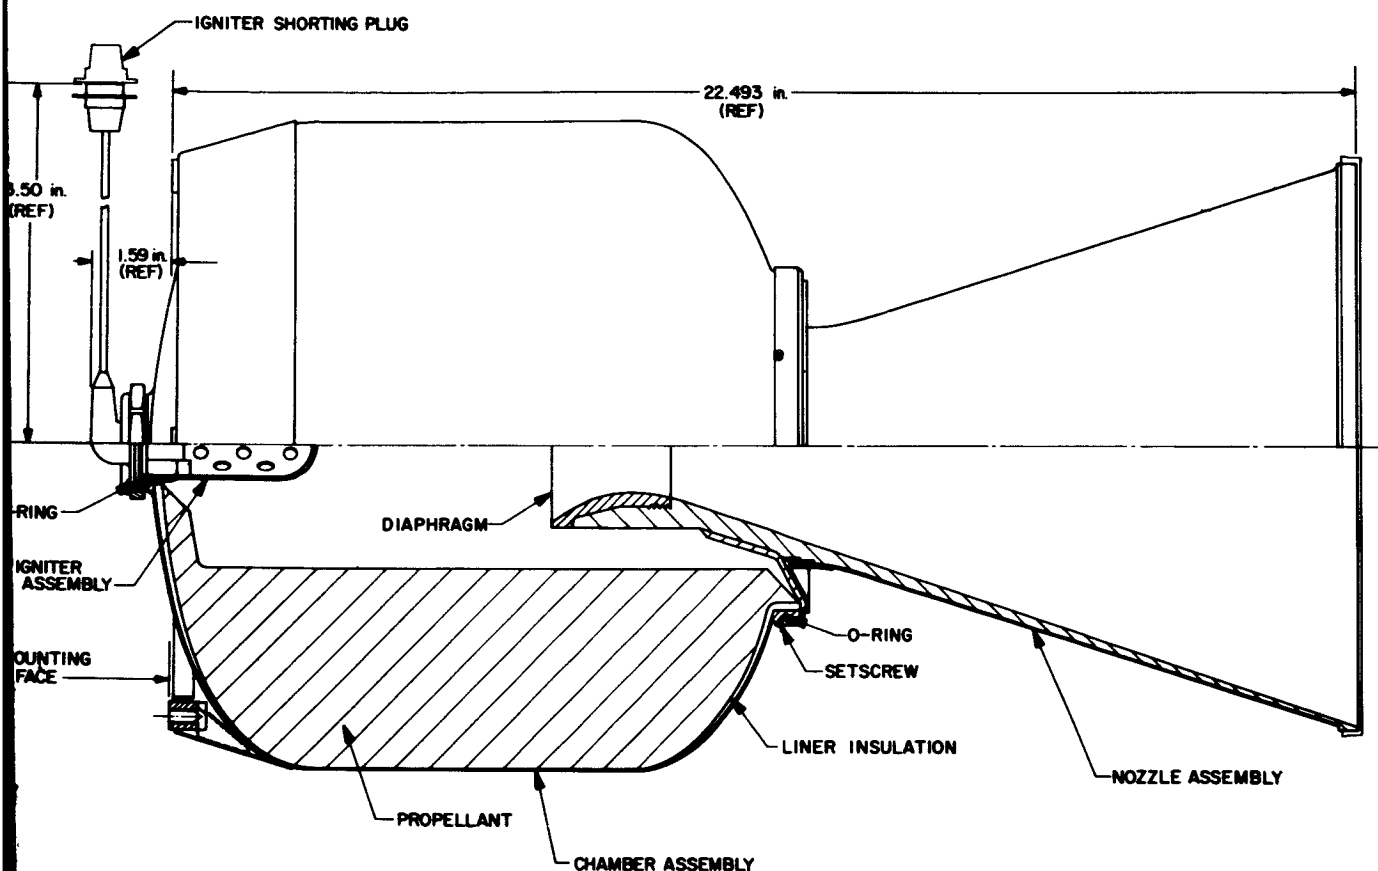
Cross-sectional drawing of flight-weight SYNCOM motor
